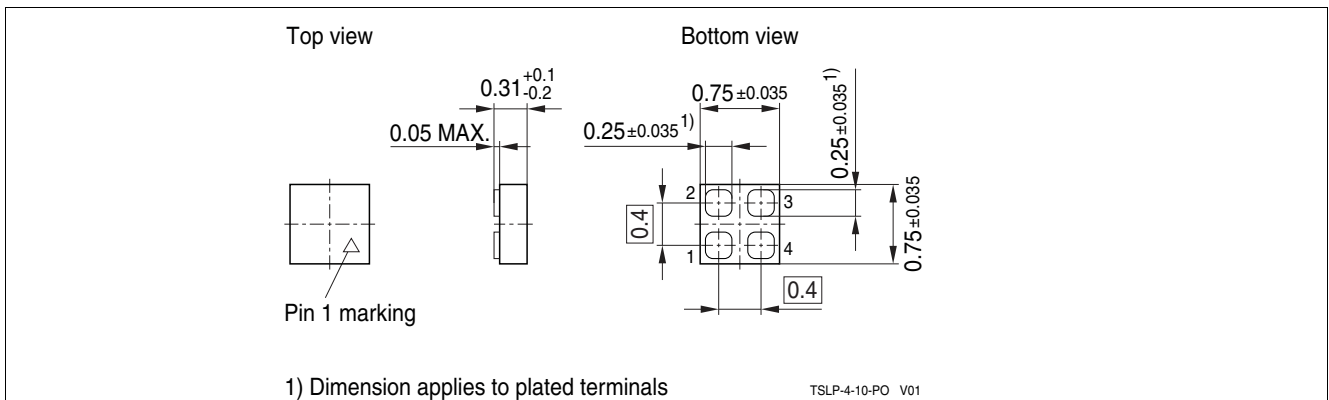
TSLP-4-10: Package outline (dimension in mm)
